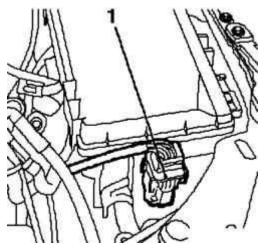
Fastening wire body mass: 1 - pin 2 - Nut
